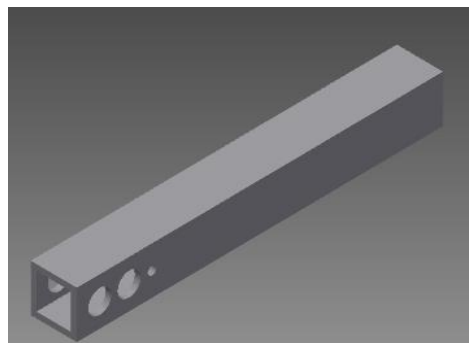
Square tube column. CAD draft square tube column in the mechanical system.
